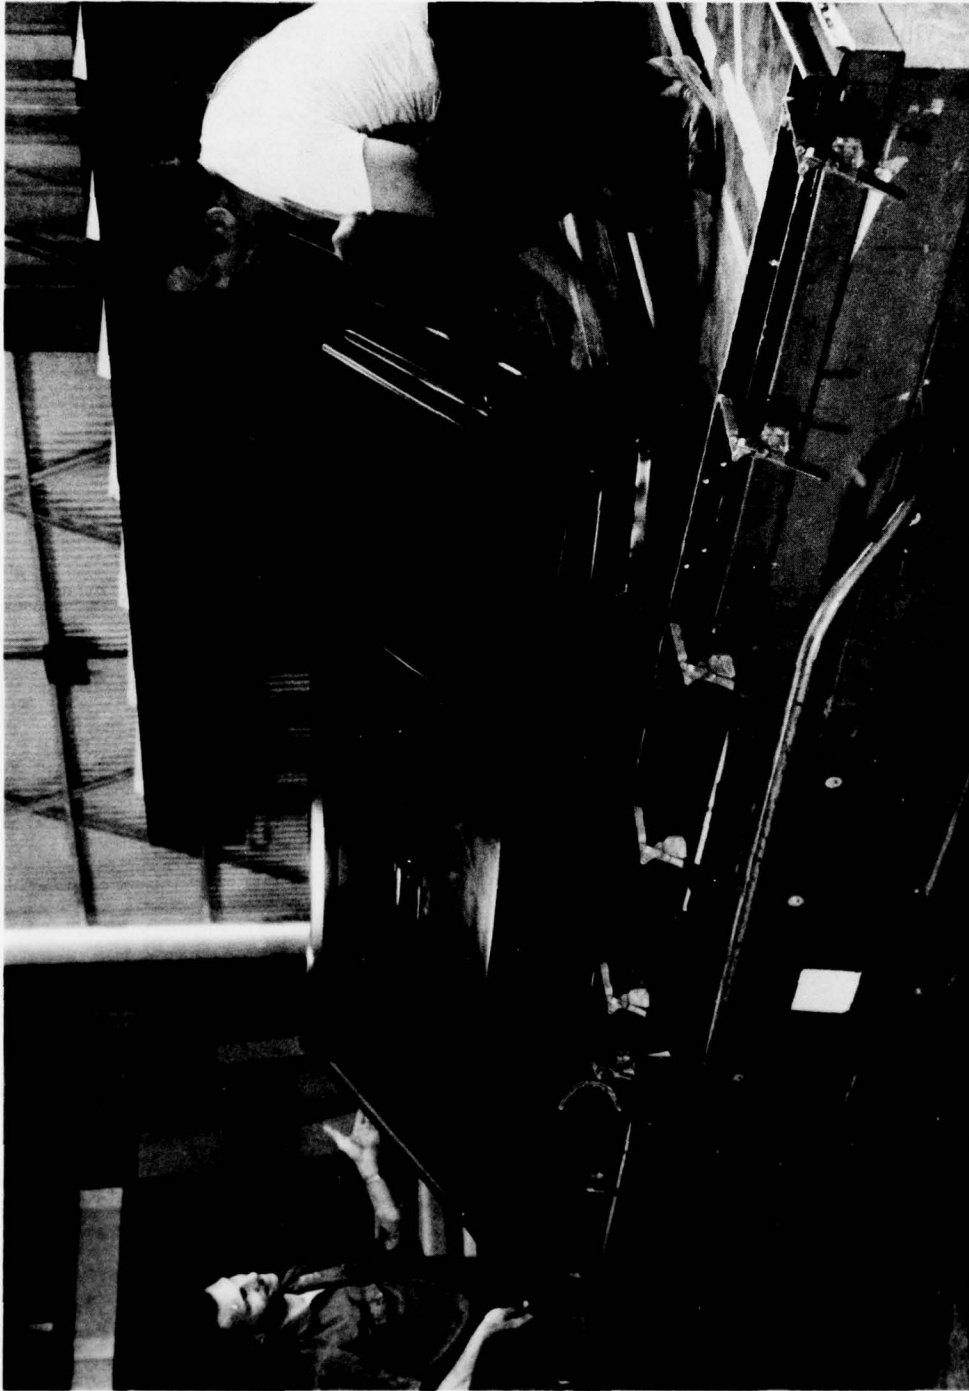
Vacuum-formed acrylic door panel being removed from forming die. (Photograph by Swedlow, Inc.)
